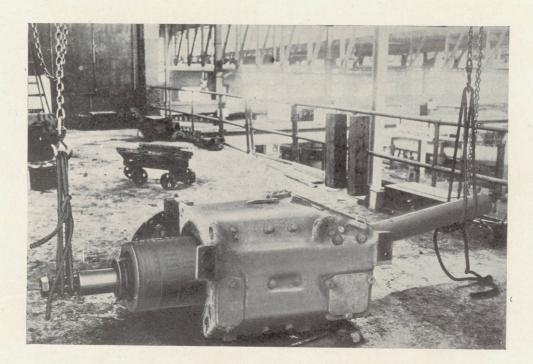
REMOVING ARMATURE FROM A BOX FRAME MOTOR. METHOD NUMBER TWO
